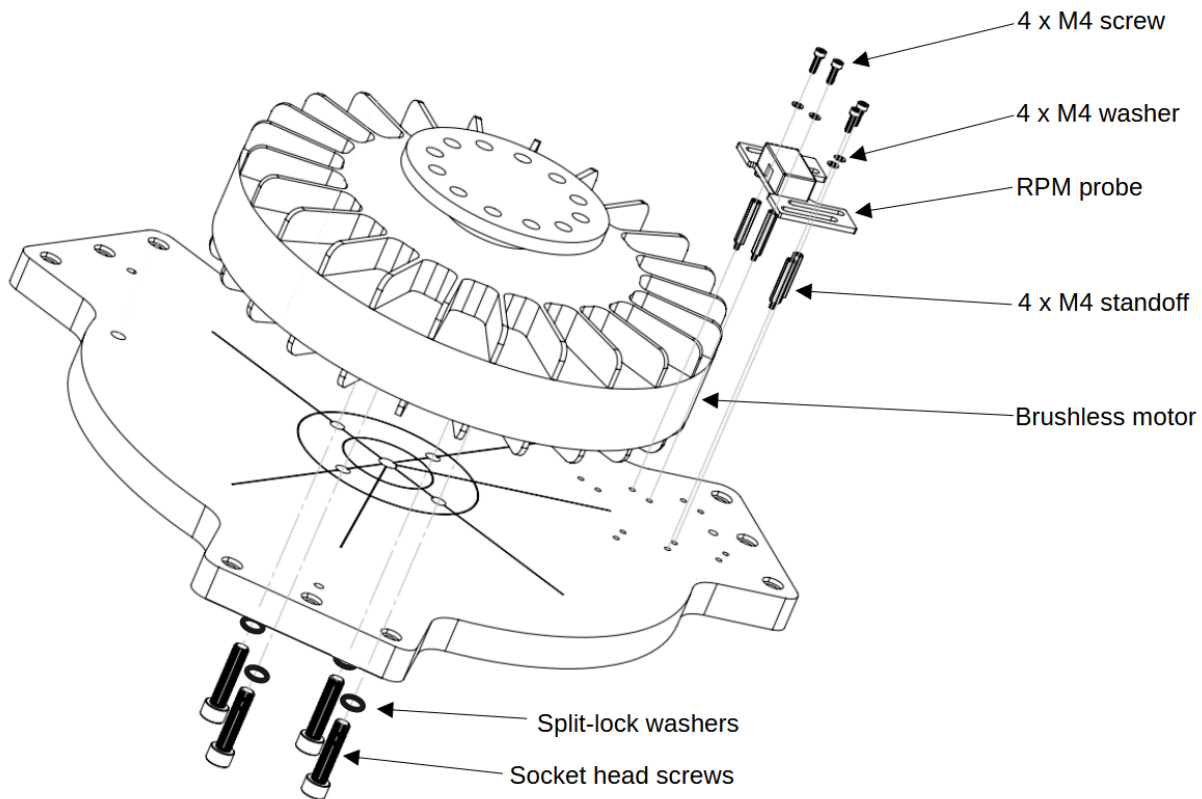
B.1: Mounting the motor on the motor mounting plate
